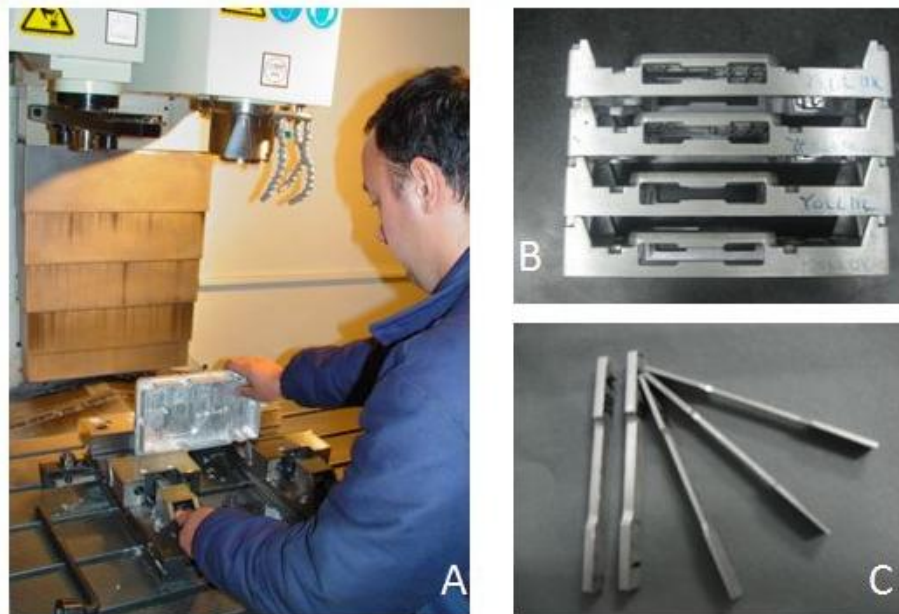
a- placing parts onto the table of CNC machine , 3.12: b- machined parts, 3.12: c- extracted specimens
